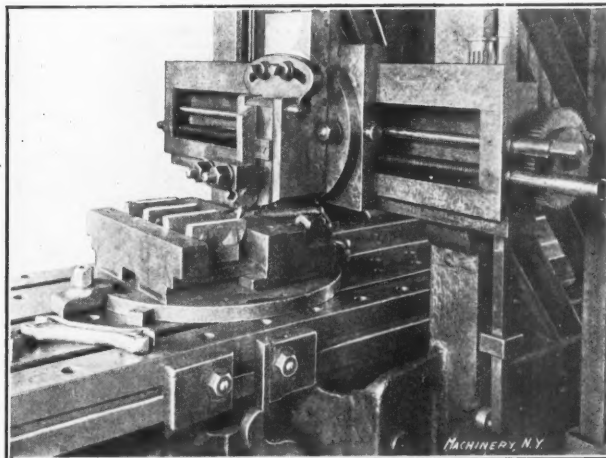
The Tool in Position Ready for the Roughing Cut.
